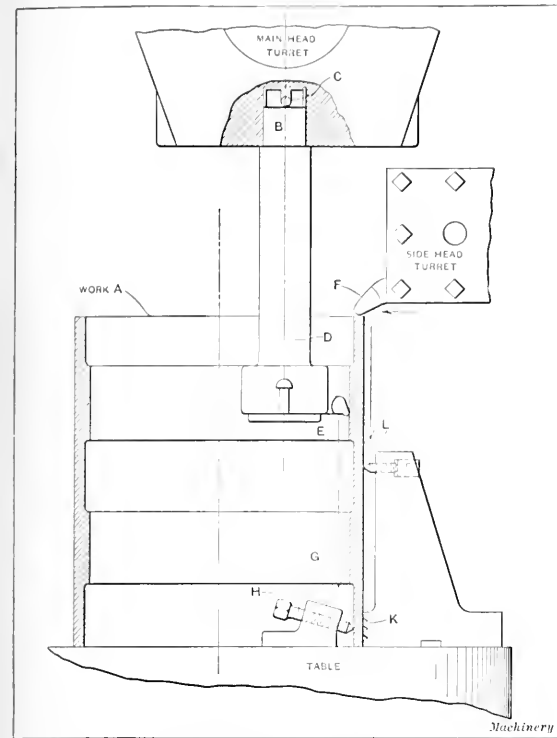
Boring, facing and turning a Thin Casting in a Vertical Turret Lathe
